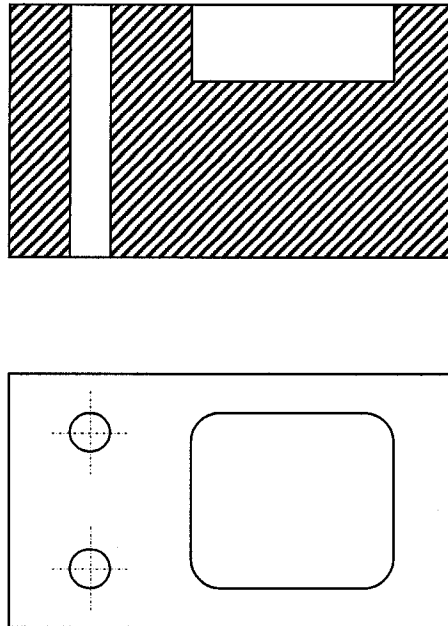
A part that can be Manufactured by a 3-Axis Machine.
